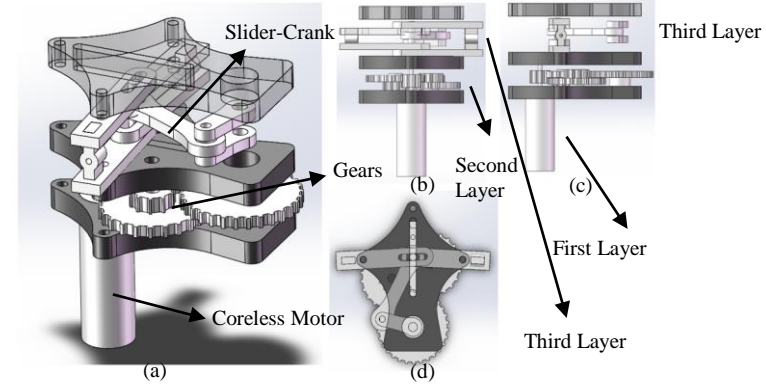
3D models for the combination of slider-crank and gears: (a) general view, (b) front view, (c) side view, and (d) top view.
